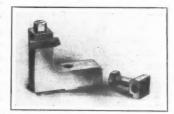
Knee Turner for Roughing and Finishing Cuts
